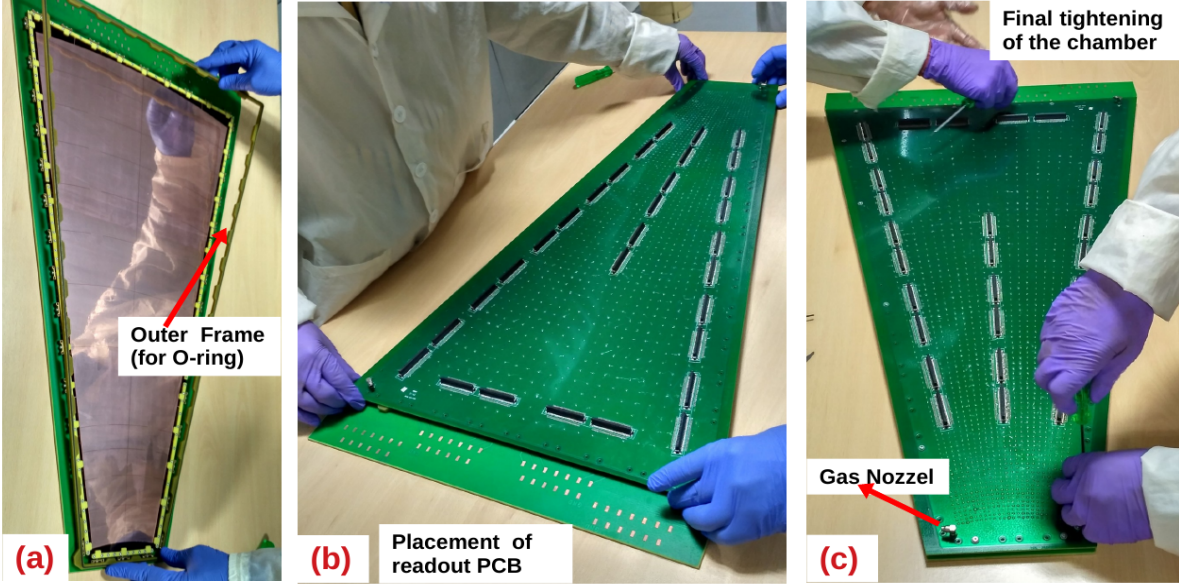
a) Placement of outer frame (containing O-ring). b) Placement of readout PCB for final tightening of chamber. c) Final tightening chamber
